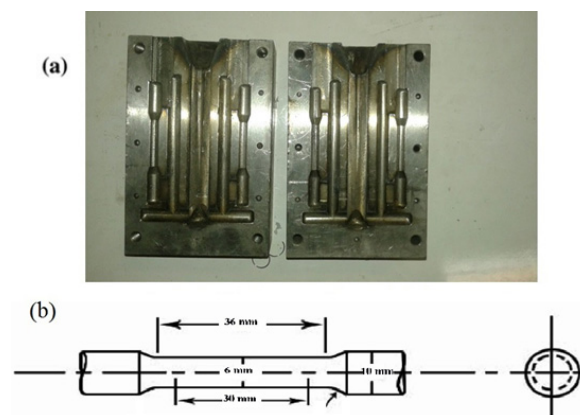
Tensile specimen geometry and dimensions (a) cast iron mold and (b) tensile sample dimensions.
